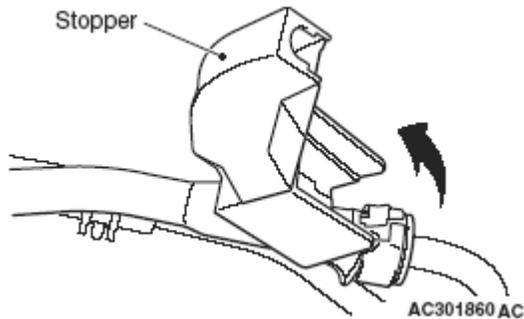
Removing Stopper Of Fuel High-Pressure Hose
